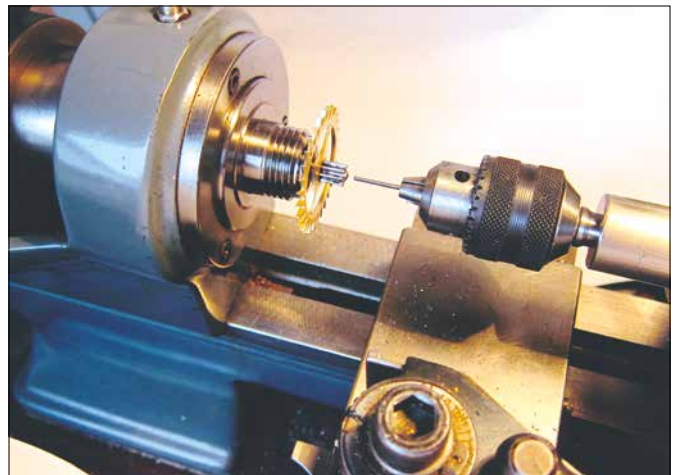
An escape wheel and arbor, held in a good collet and drilled from the tailstock.
